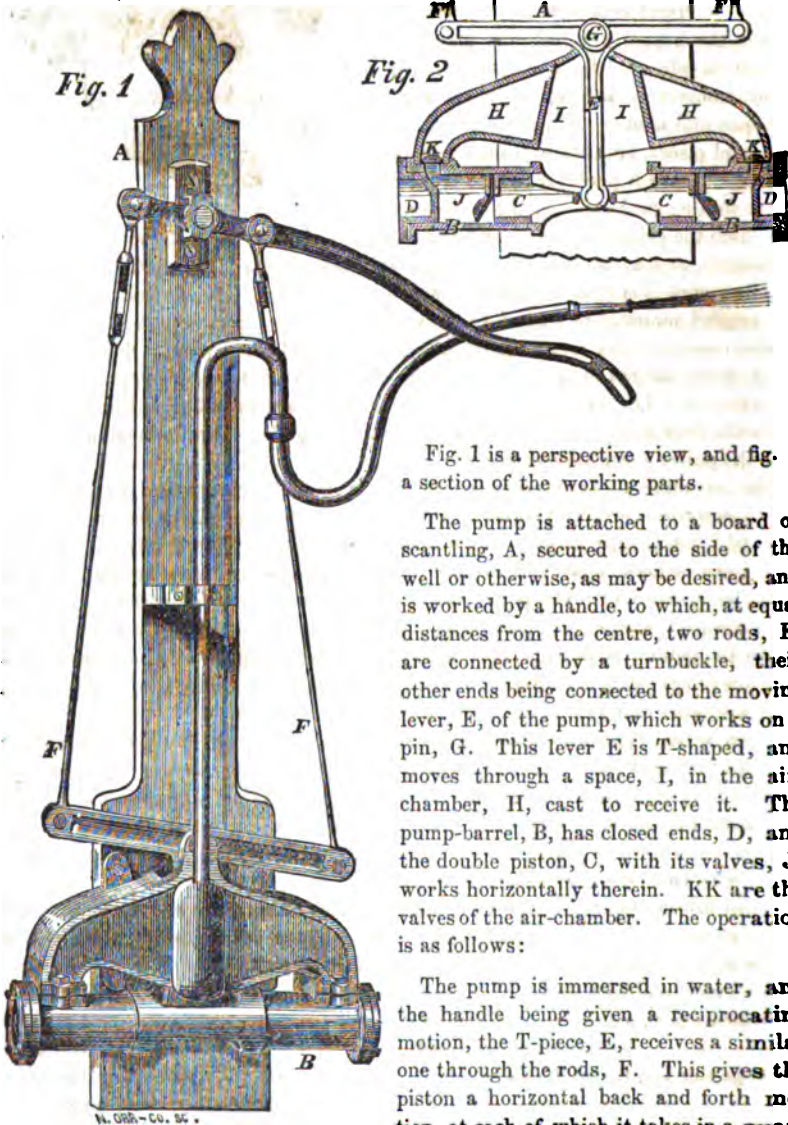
is a perspective view, and fig. 2 a section of the working parts.
